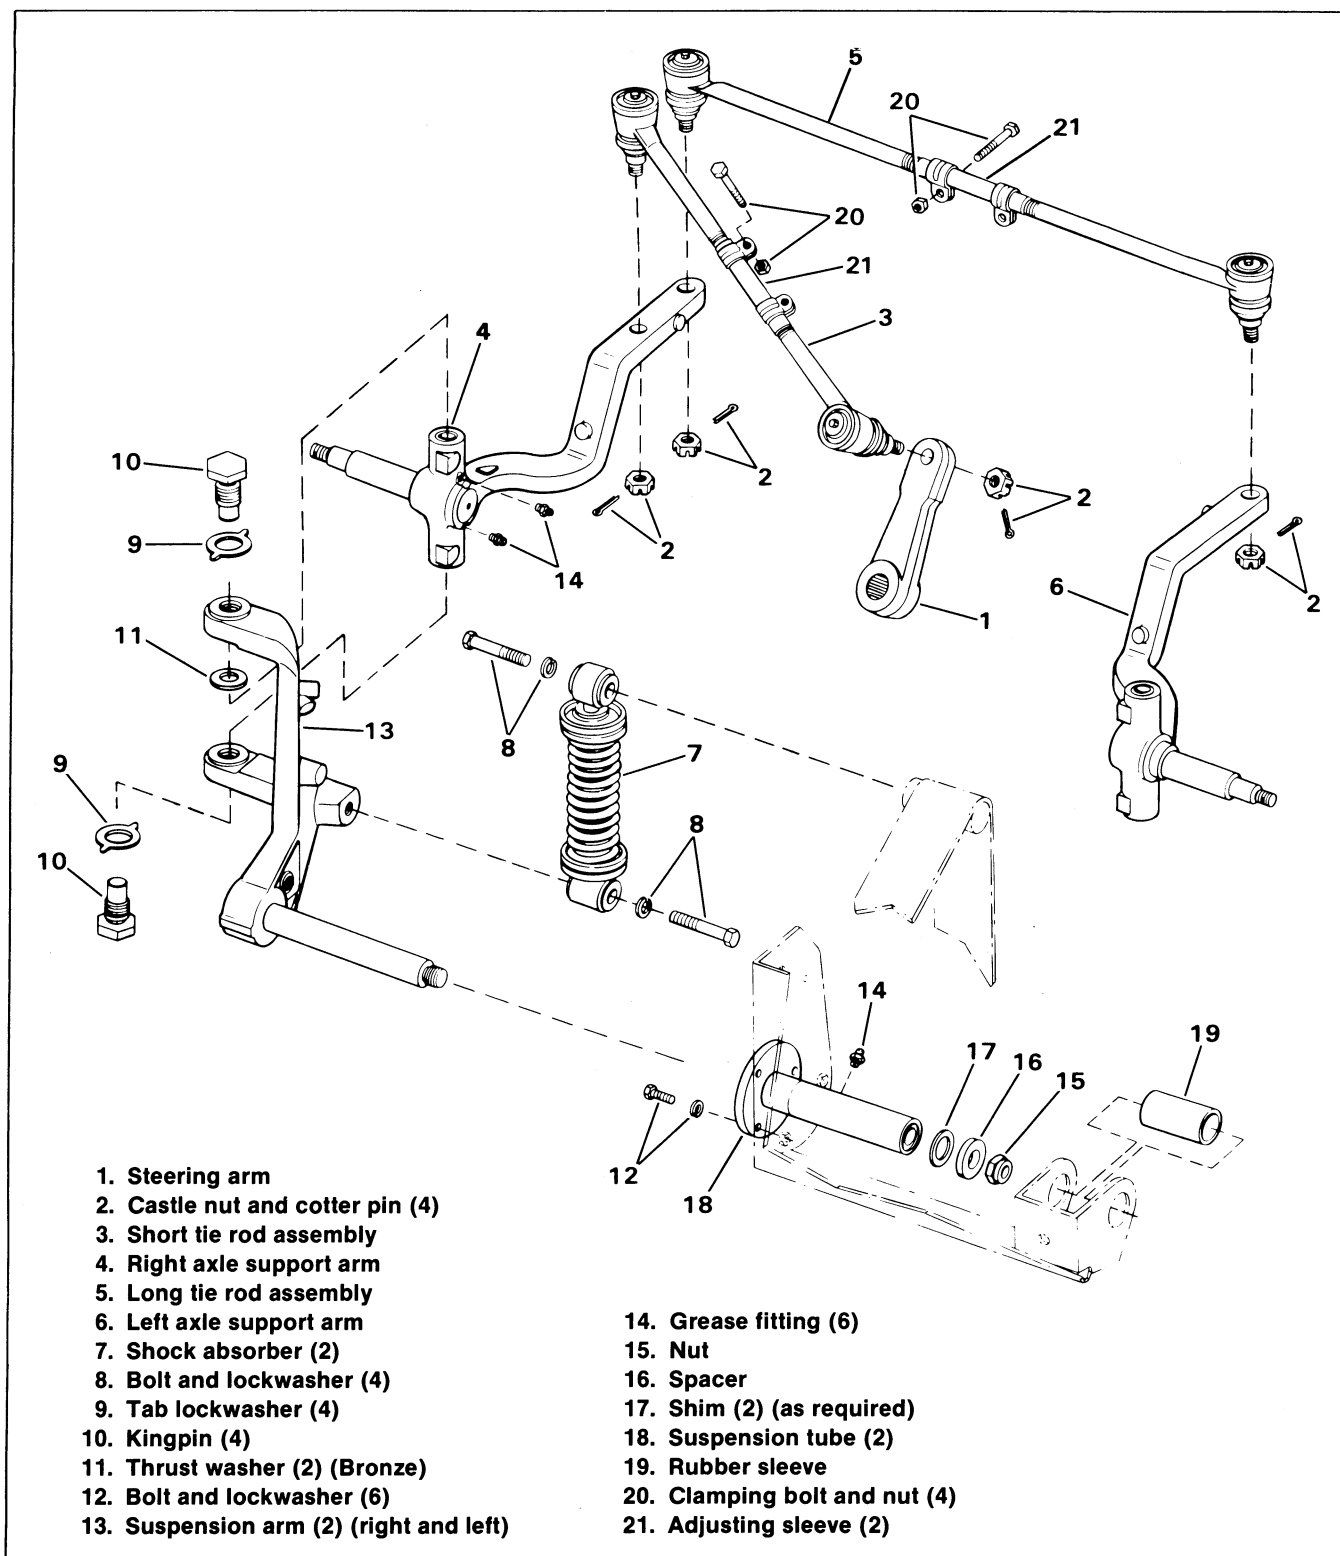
Front Suspension, 4 Wheel Car — Exploded View
